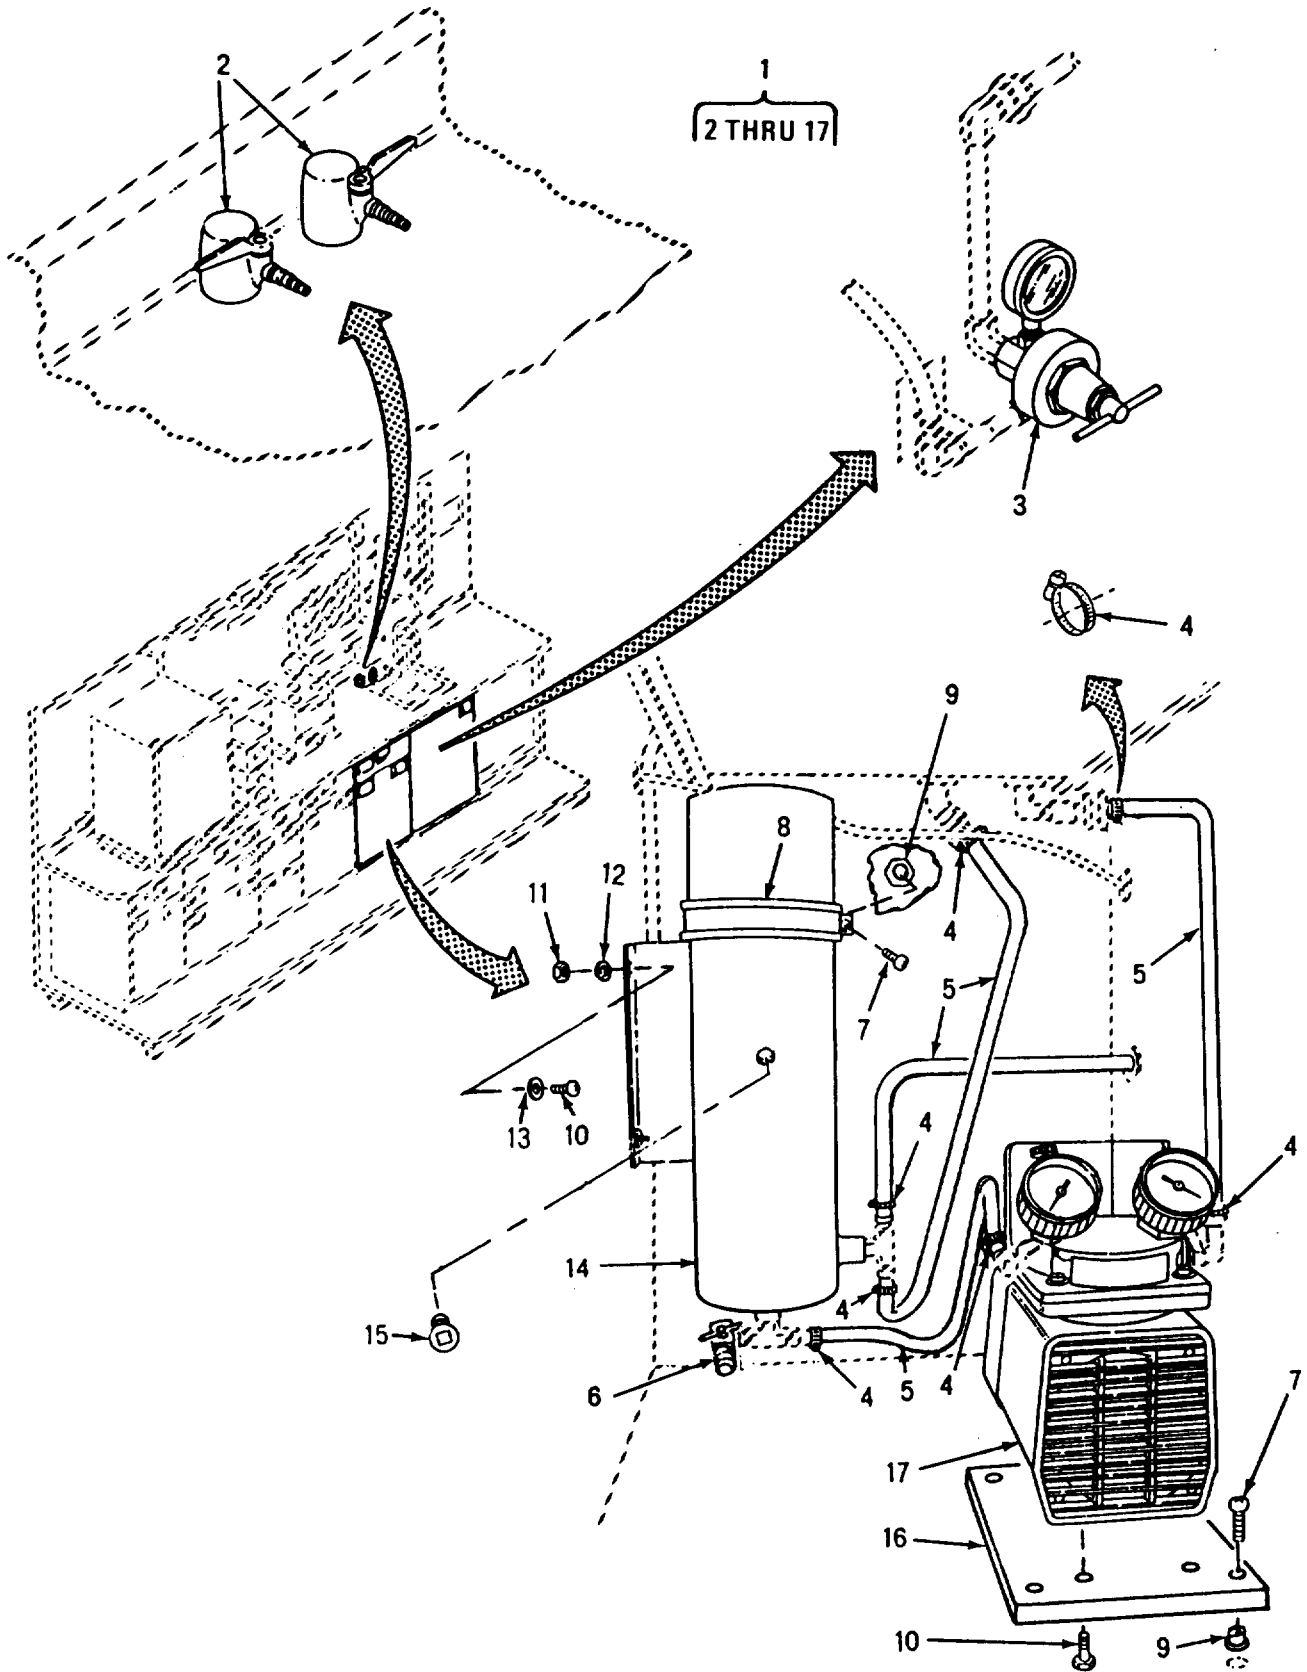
Vacuum - Air Pressure Pump, Air Surge Tank, Stopcock Assembly and Pressure Regulator
